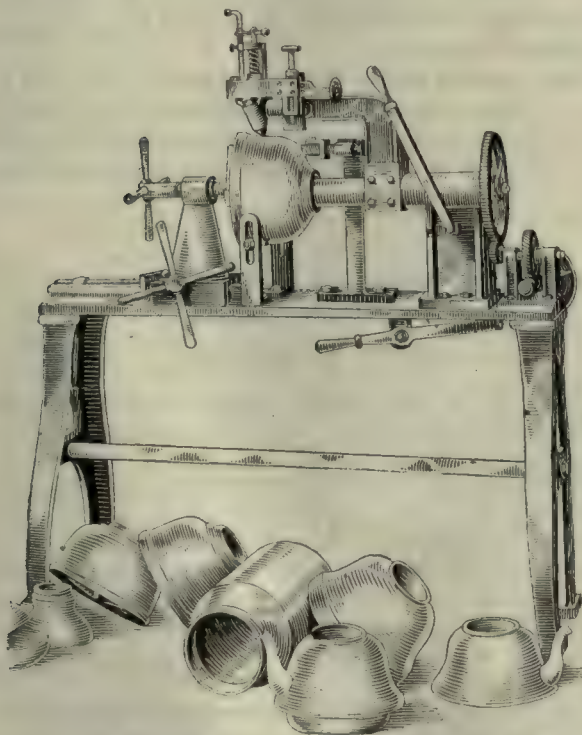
MACHINE FOR WELDING CIRCULAR SEAMS
